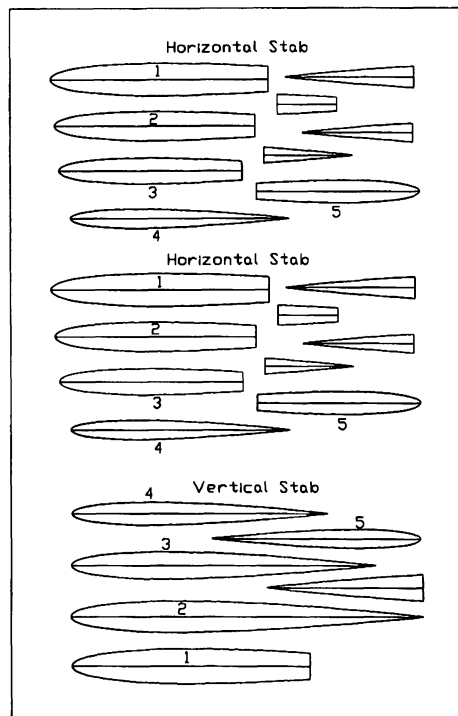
Vertical and Horizontal Stabilizer Plot Layouts
